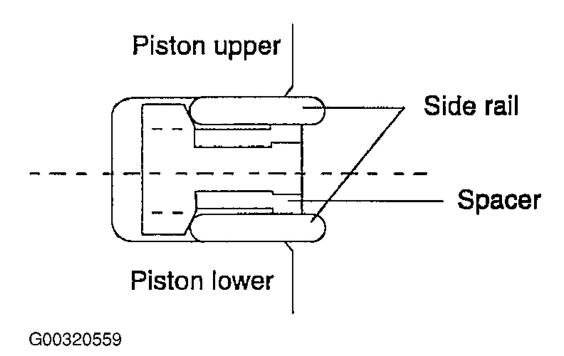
Positioning Oil Ring Courtesy of KIA MOTORS AMERICA, INC.
